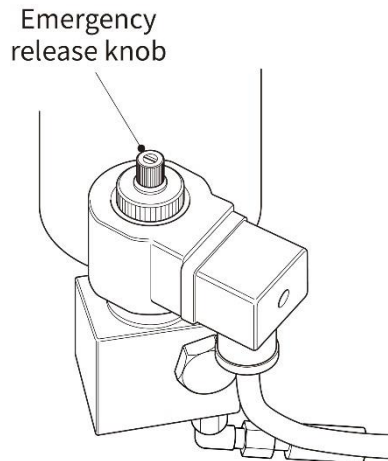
Belt Frame hydraulic cylinder solenoid valve
